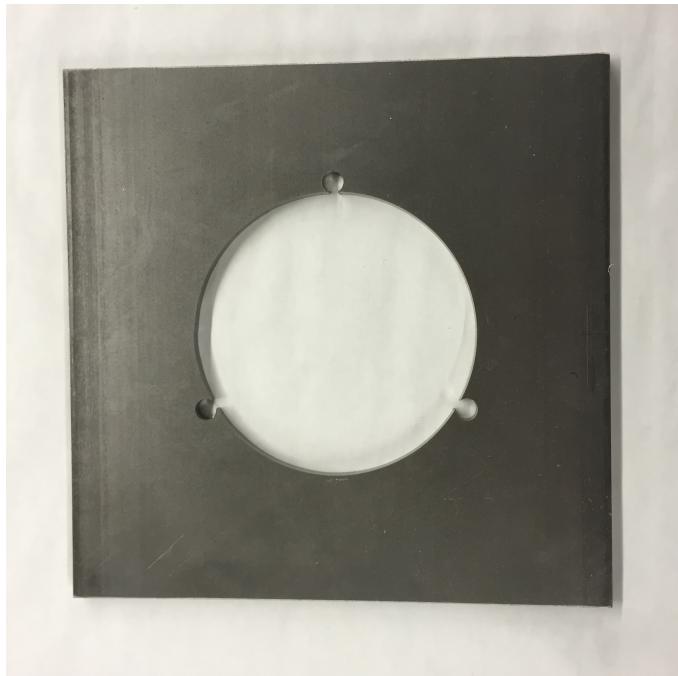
An error in the CNC machine resulted in a badly cut plate.
